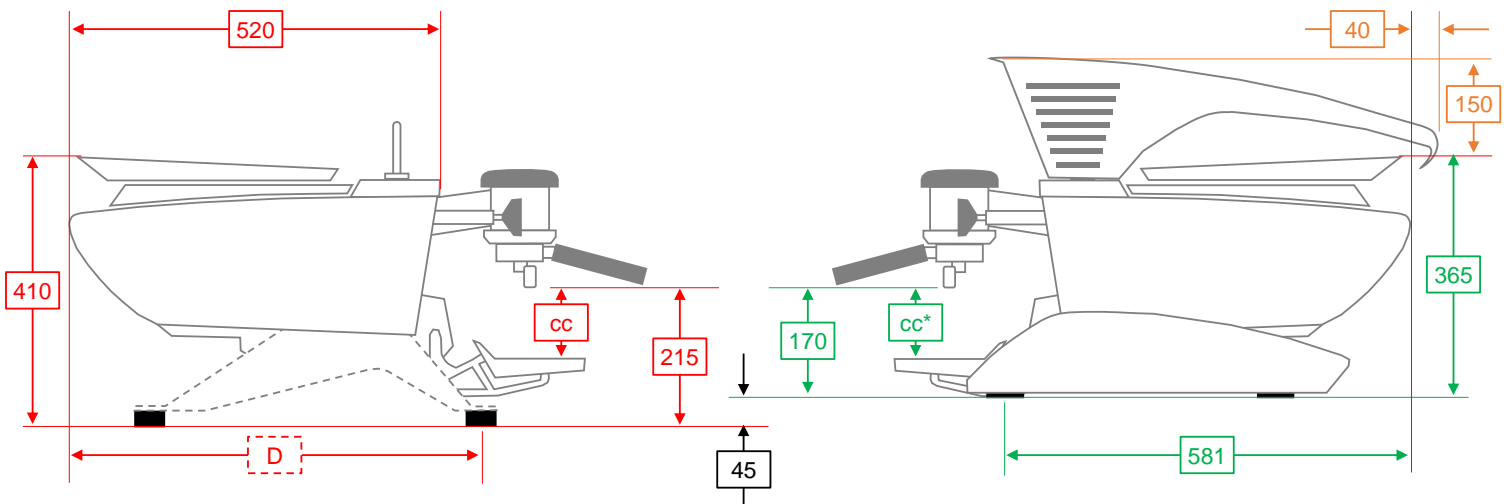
General dimensions in mm. On left the outline of the STRAIGHT-leg (dashed grey line). With FAT-TUBE and TECH legs, the leg outline and dimensions of D and cc changes, see Table 2. On right (in green) the dimensions with the caterpillar legs which lowers the machine by 45mm. The extra dimensions caused by the awning are shown in orange. Awning is available for all legs. cc = adjustable cup clearance with (double) spouted portafilter. Not shown on this figure is that the optional glass-look cup-rail increases the height with 40mm.
